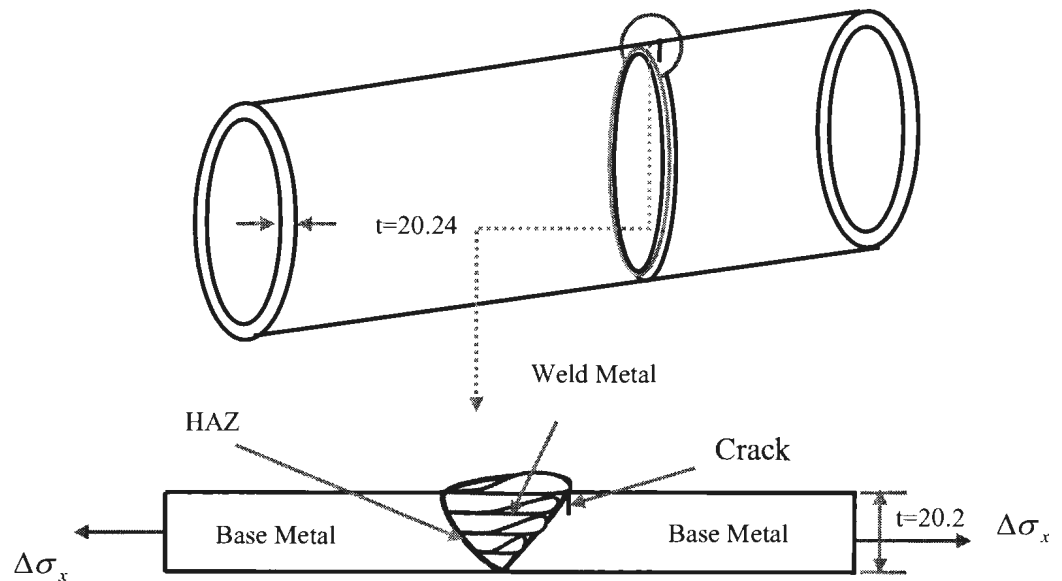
Girth weld (Butt) through the thickness in pipeline
